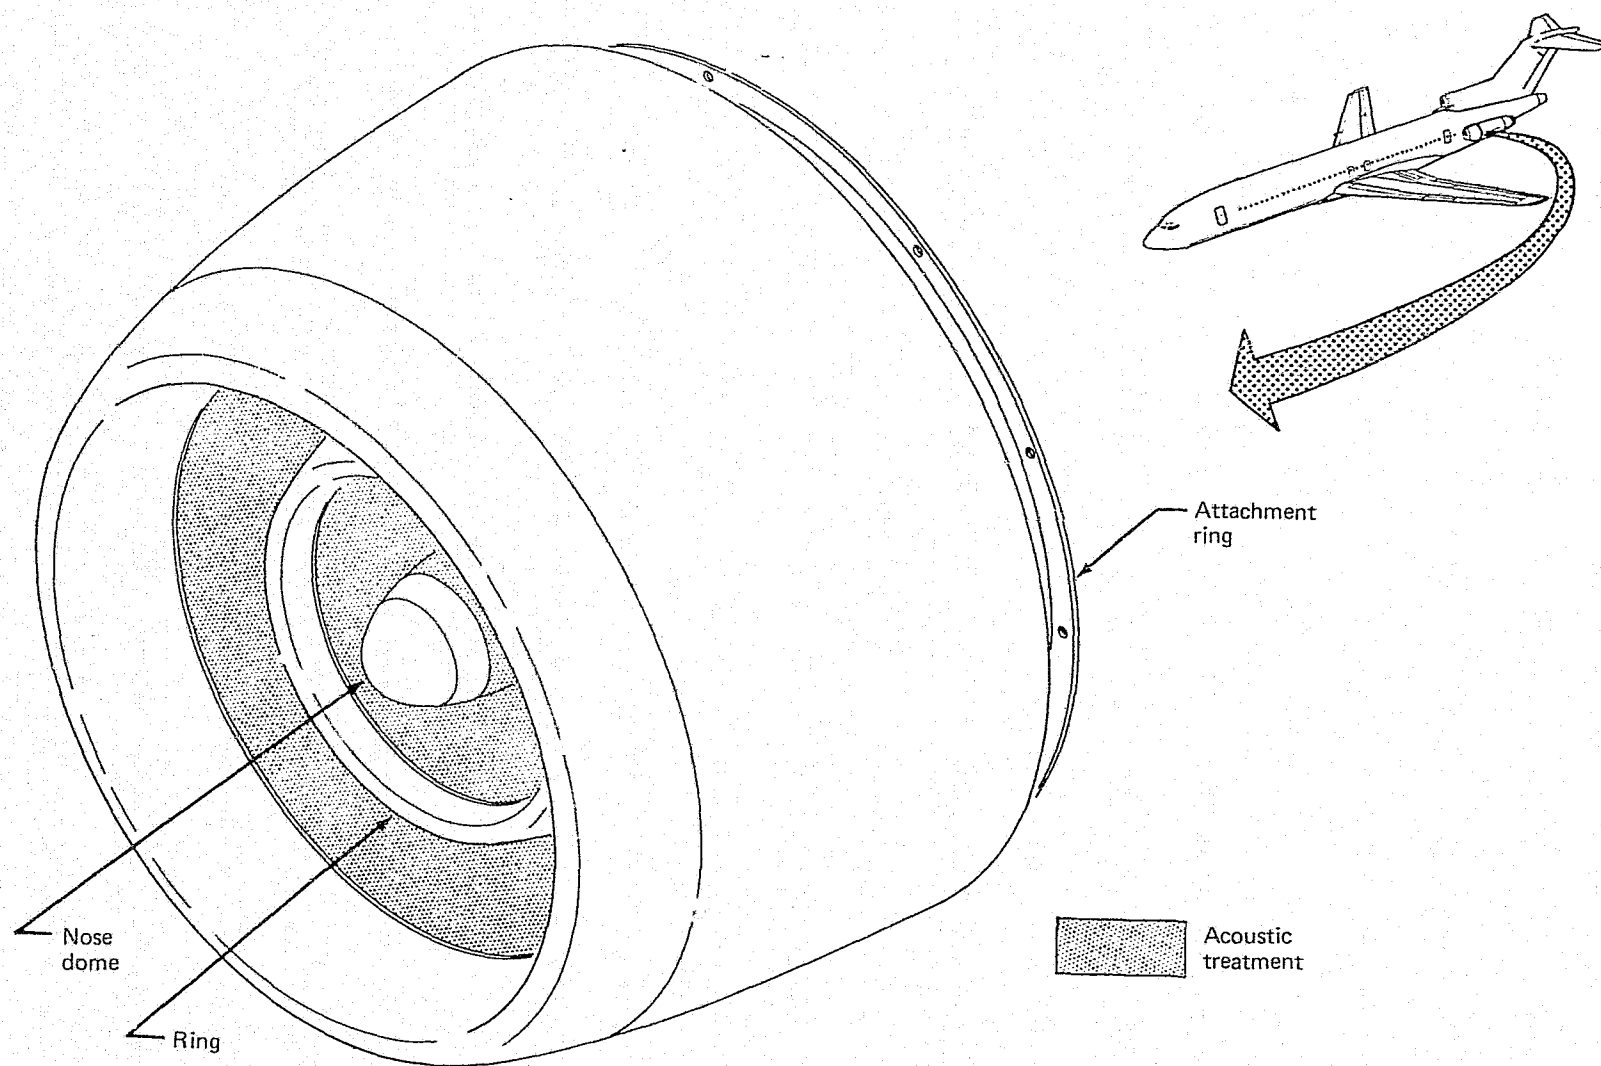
JT8D Refan Side-Engine Inlet Assembly
